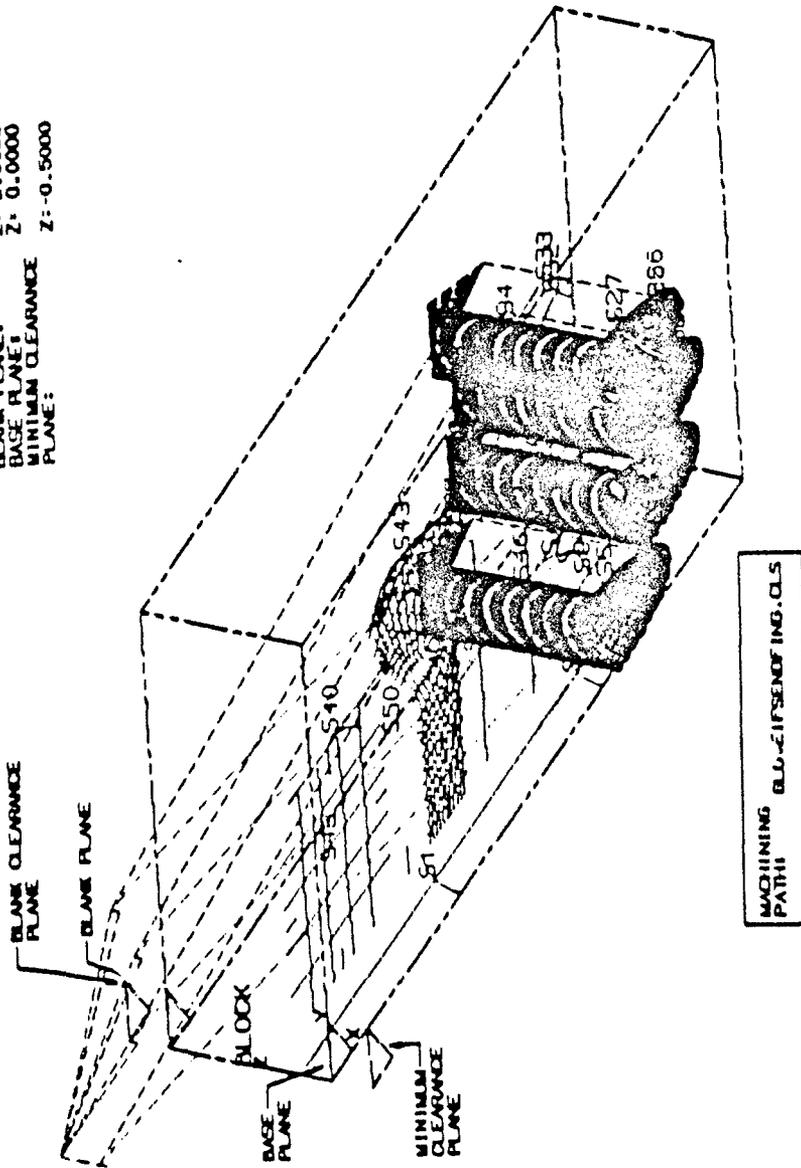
Machining Path: GLOVE1FSENDP1NG.CLS
